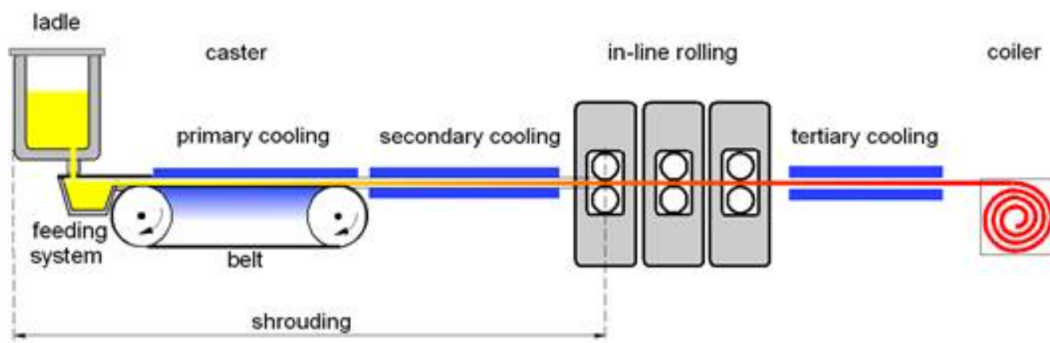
Scheme of a direct strip casting equipment.[41]
